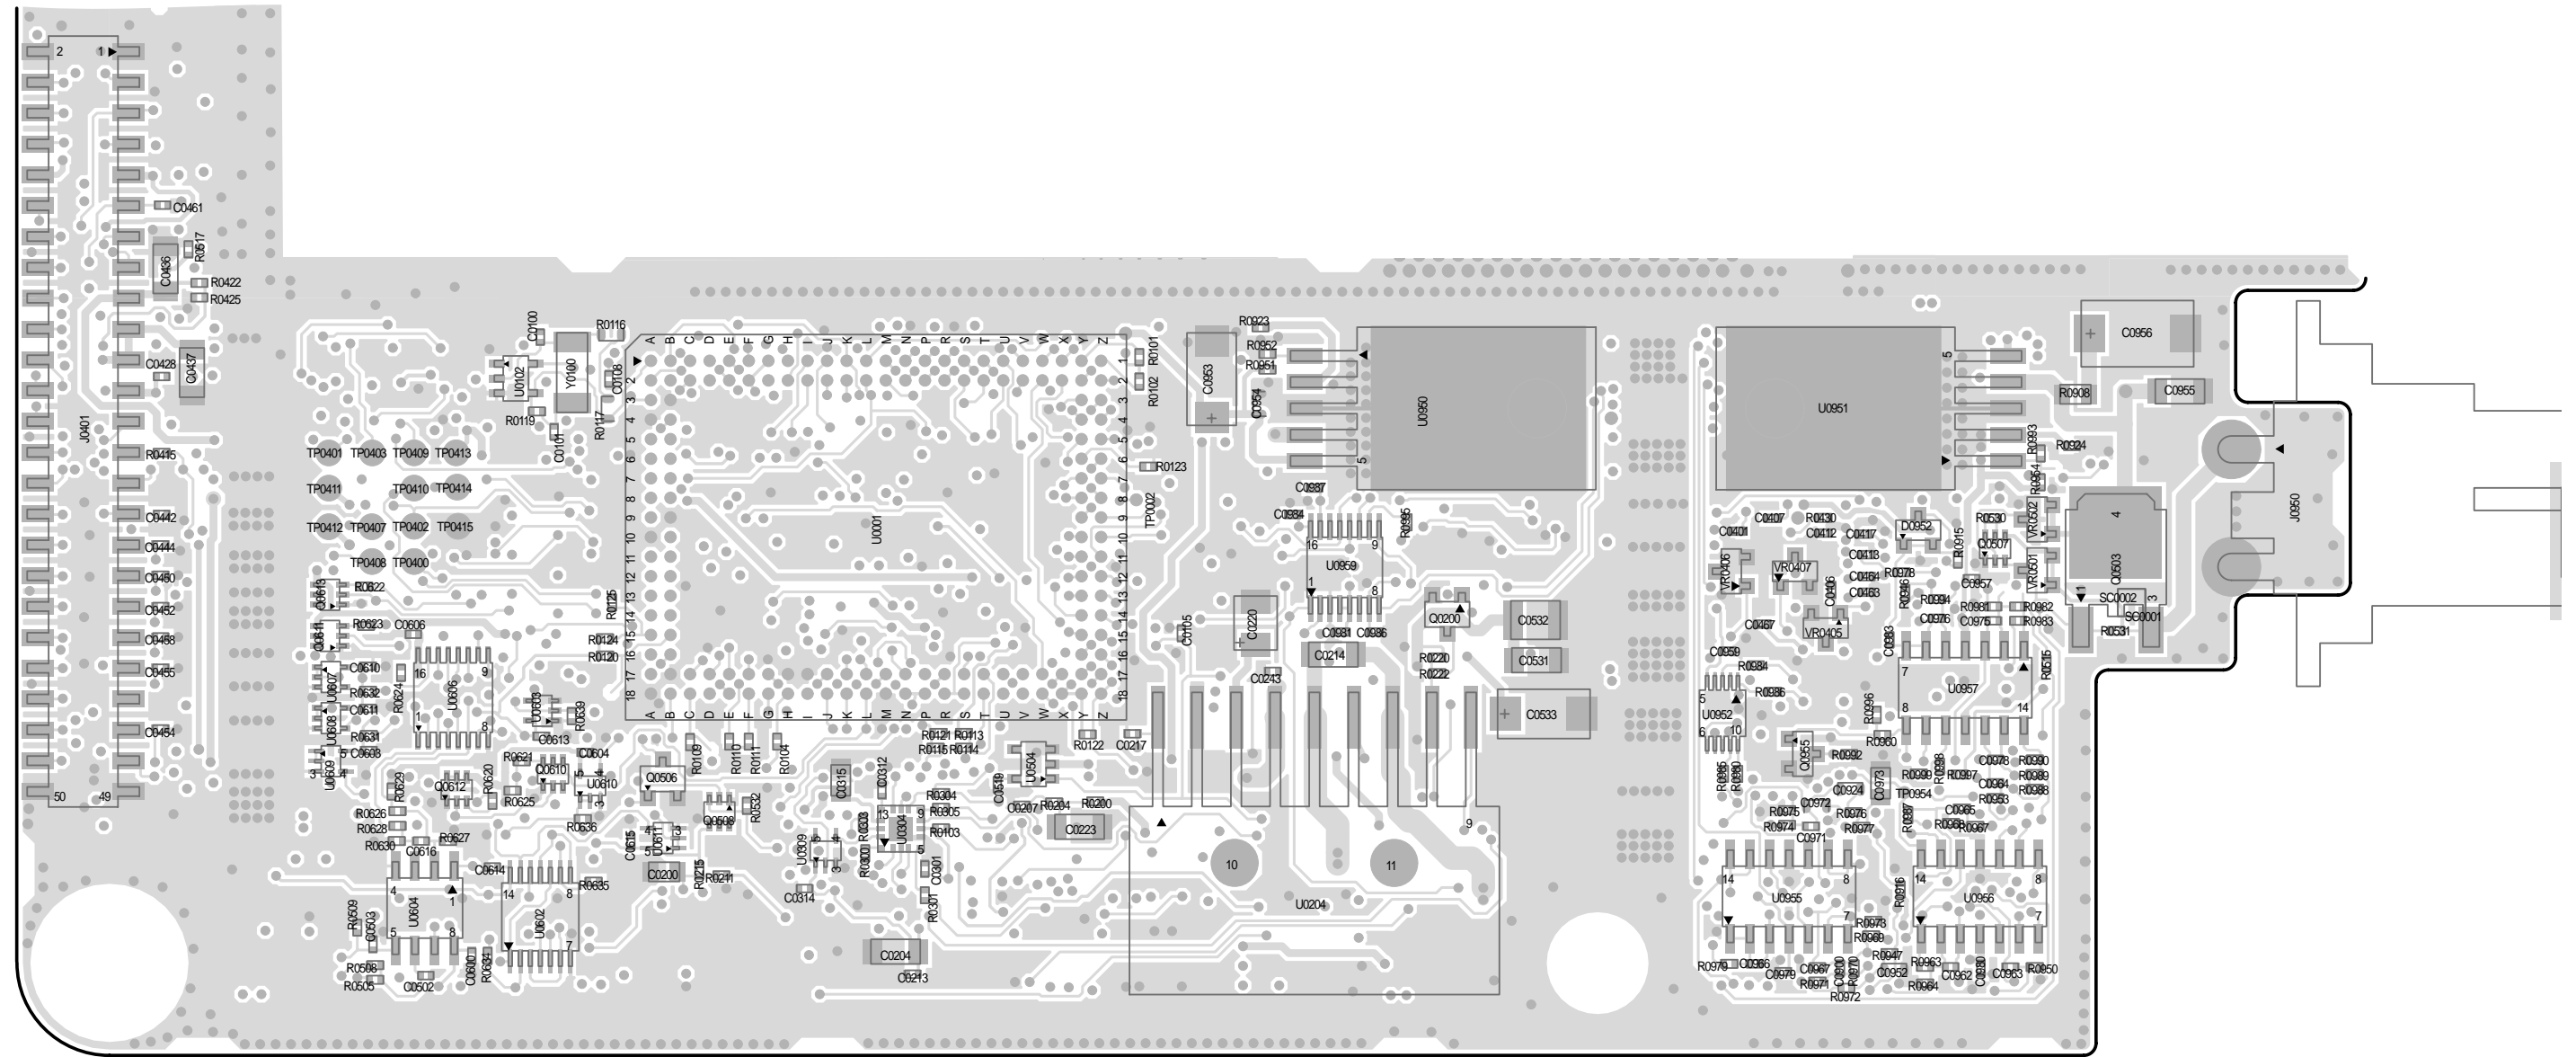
HUE4040A Main Board Layout—Side 1 Bottom
